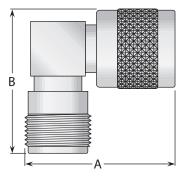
(Right angle jack-plug; connects one plug and one jack)
